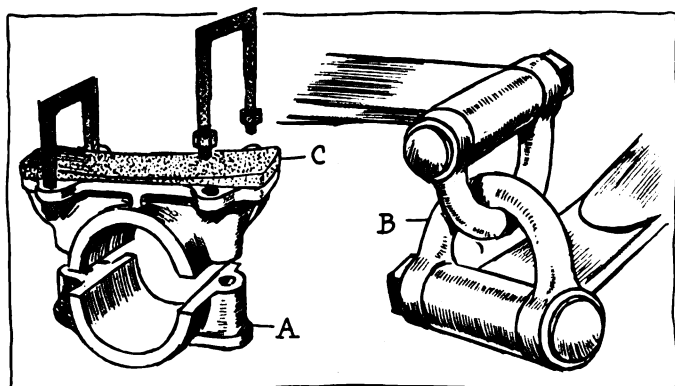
Fixtures for spring installation; A, spring pad; B, double shackle; C, fiber block filed to shape
